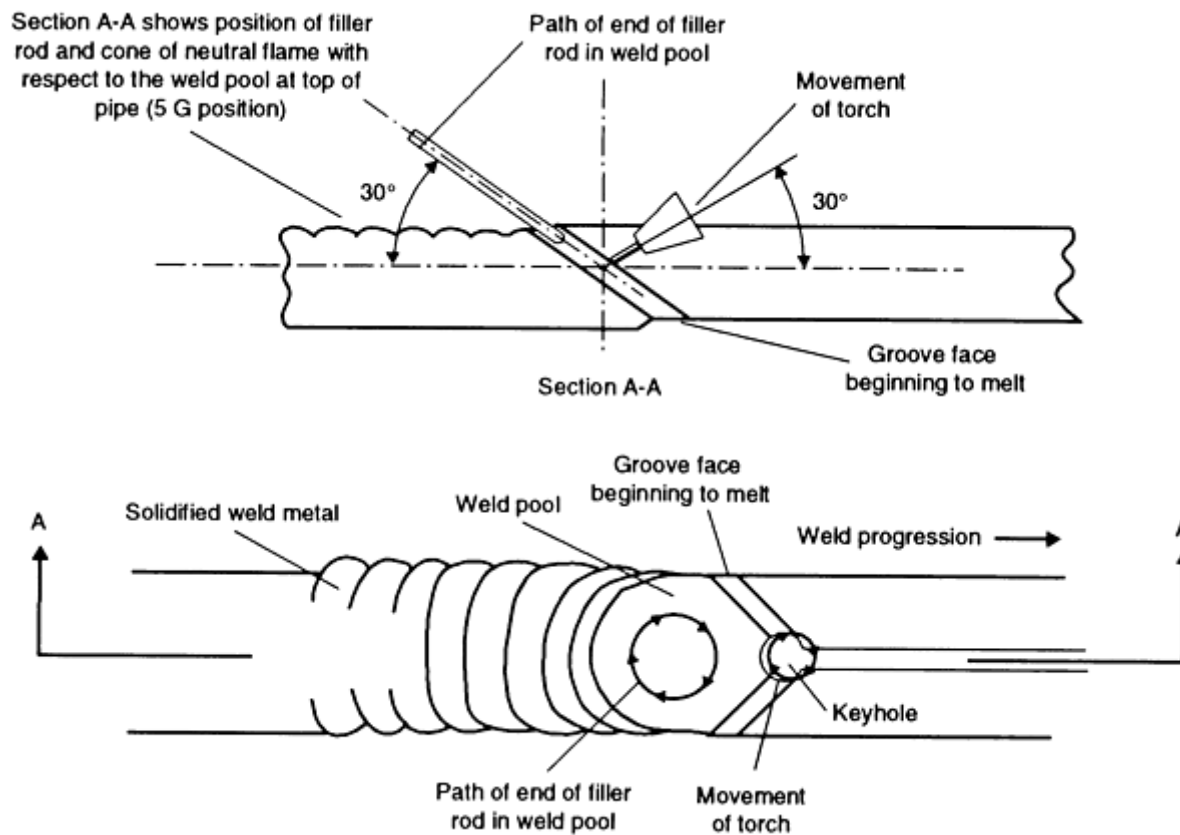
ORIENTATION AND MOTION OF TORCH RELATIVE TO WORKPIECE IN ONE-PASS BACKHAND OXYACETYLENE WELDING. THE CONE OF FLAME SHOULD BE KEPT CLOSE TO, BUT SHOULD NEVER TOUCH, THE WELD POOL OR PIPE GROOVE FACE. SOURCE: REF 5
